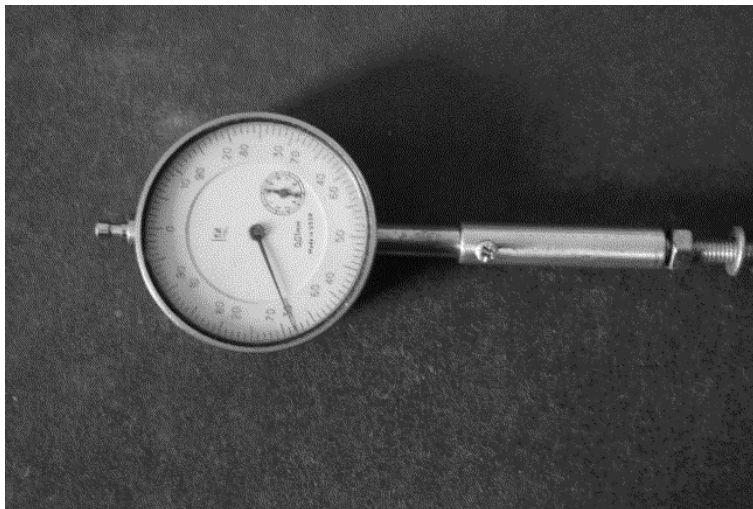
Recorded picture of a measurement sensor – a clock indicator.
